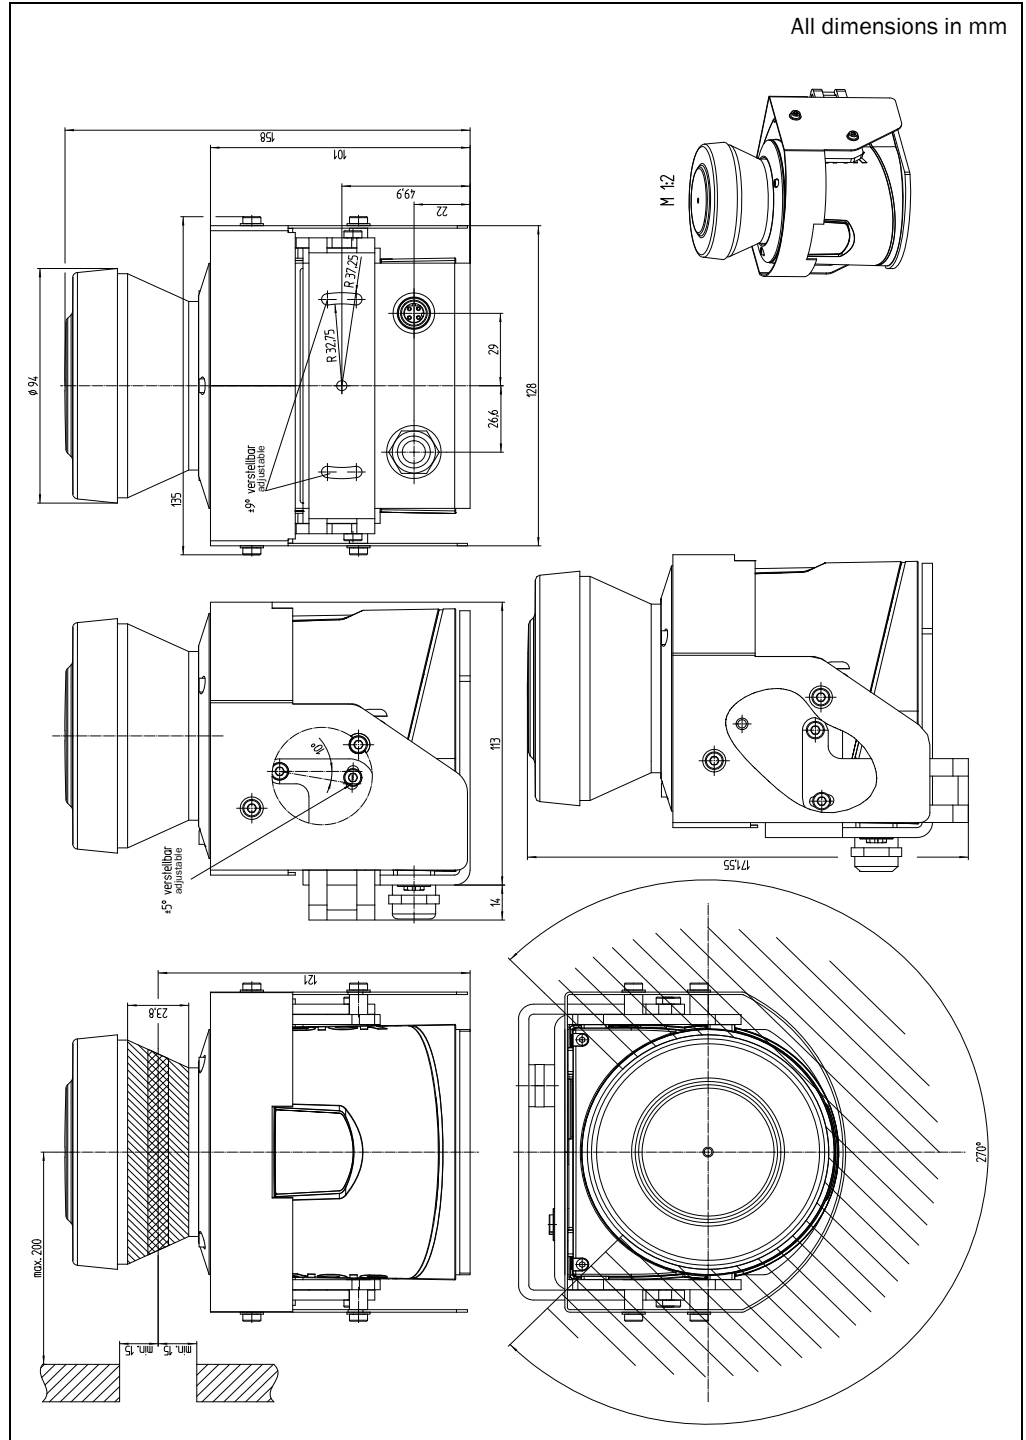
Dimensional drawing LMC12x VdS with VdS mounting kit 2
